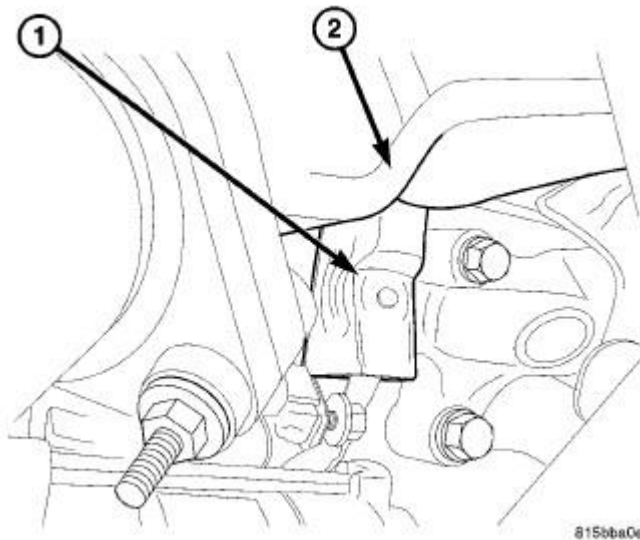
KNOCK SENSOR HEAT SHIELD - 6.1L
